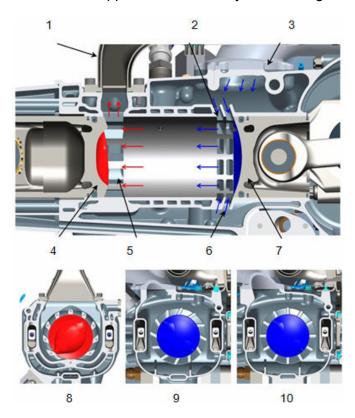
The architecture of the gas exchange process in the EM100D engine: 1 – exhaust manifold; 2 – swirl intake ports; 3 – intake manifold; 4 – exhaust piston; 5 – exhaust ports; 6 – straight intake ports; 7 – intake piston; 8 – section through exhaust ports; 9 – section through intake swirl ports; 10 – section through straight intake ports.
